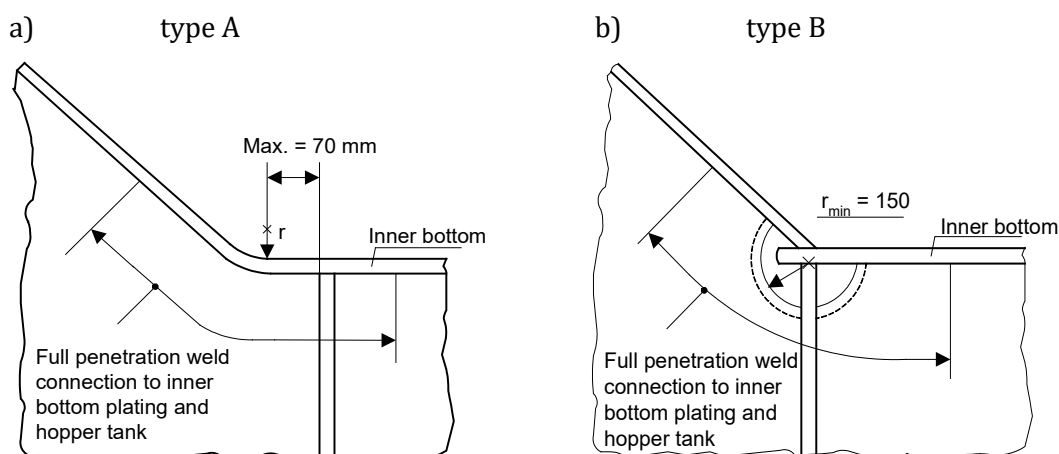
Connection of inner bottom plating and hopper tank plating
